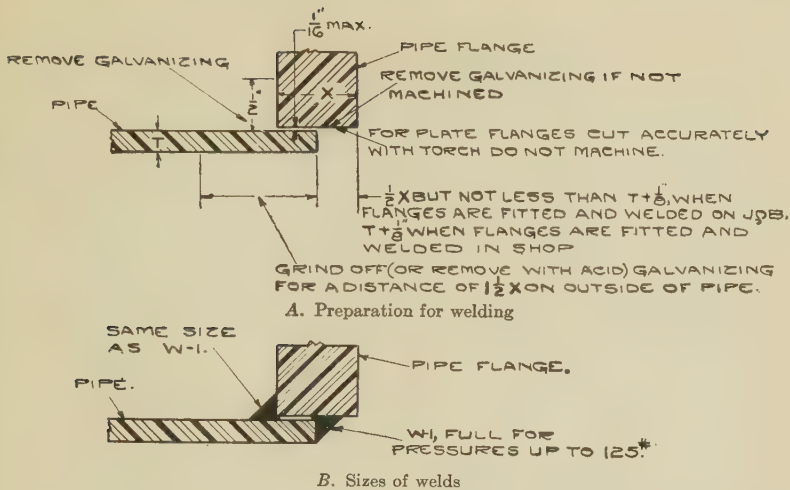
Welded black and galvanized pipe flanges for low-pressure work.
